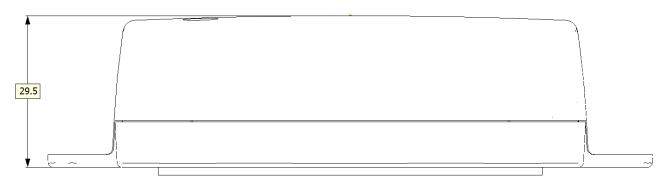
LDSBUS Thermocouple Sensor Adapter Dimension – Side View
